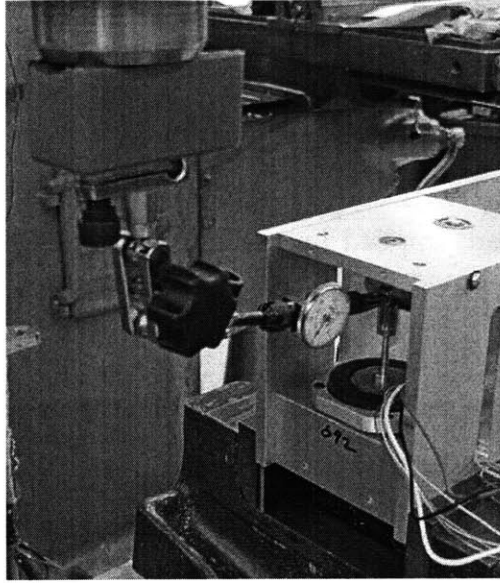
Setup for measuring runout of one of the thumb motors in assembly. The setups for other motors were similar.
